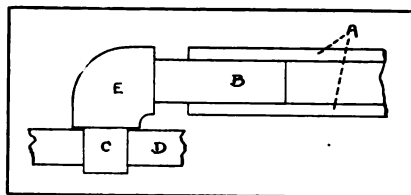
SECTIONAL VIEW OF STUD MADE IN ONE PIECE:
